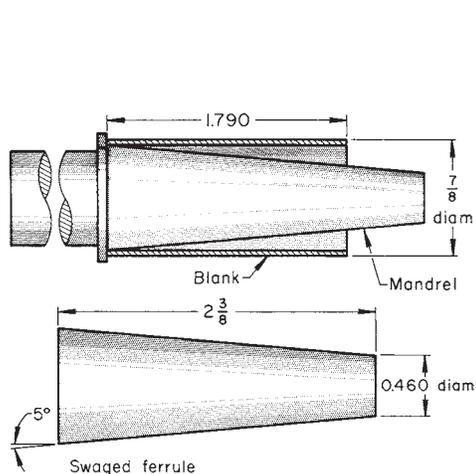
Swaging a ferrule from tube stock (alloy C26000, cartridge brass, quarter hard, 0.032 in.) in preference to press forming. The change from press forming to swaging lowered tooling costs and resulted in a 50% increase in production. Dimensions given in inches
